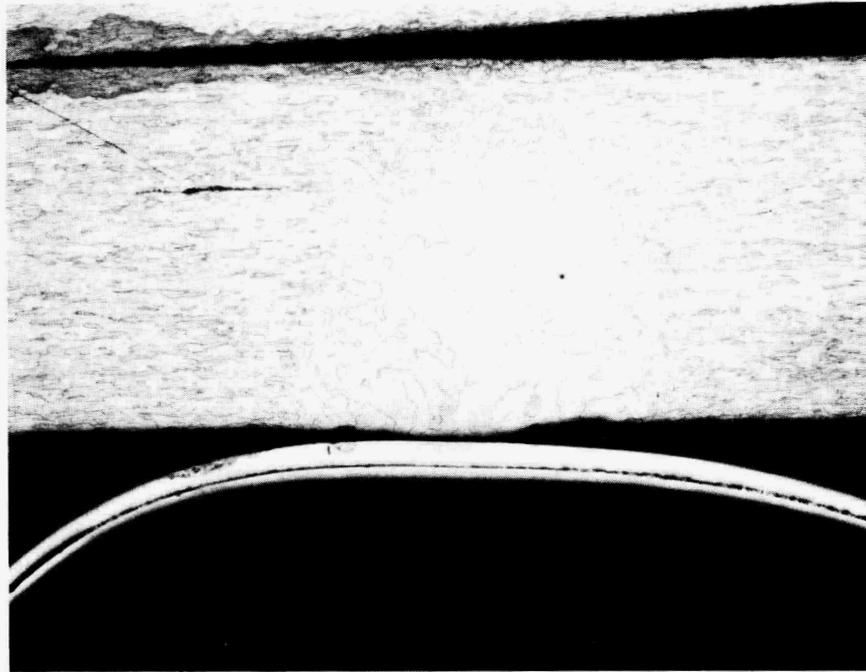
Cross-section microstructure of E-beam weld in un-nitrided Mo-186 Hf.
